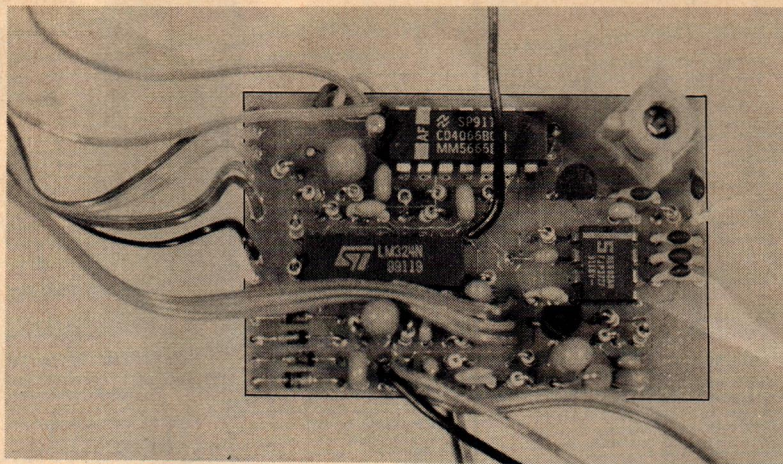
PHOTO OF THE COMPLETED guitar transmitter circuit board showing wiring to off-board components. Note the star-shaped tuner body.
